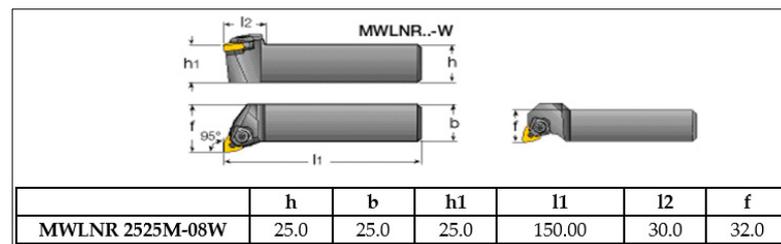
Cross-sections and dimensions of the tool holder (mm).
